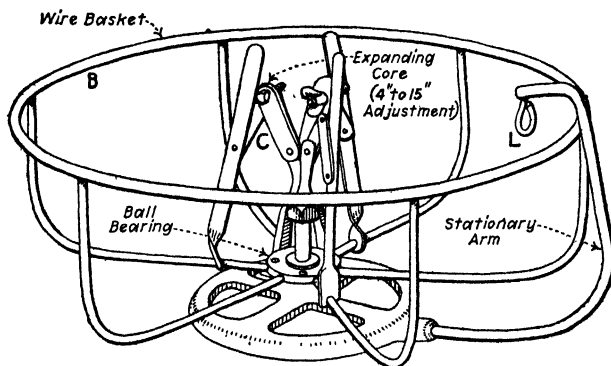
Reel made by the Wiring Equipment Company. (It is made in two stock sizes of 12 in. and 24 in. outside diameter.)
